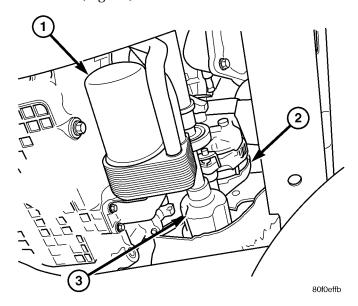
GENERATOR LOCATION - 2.4L TURBO
